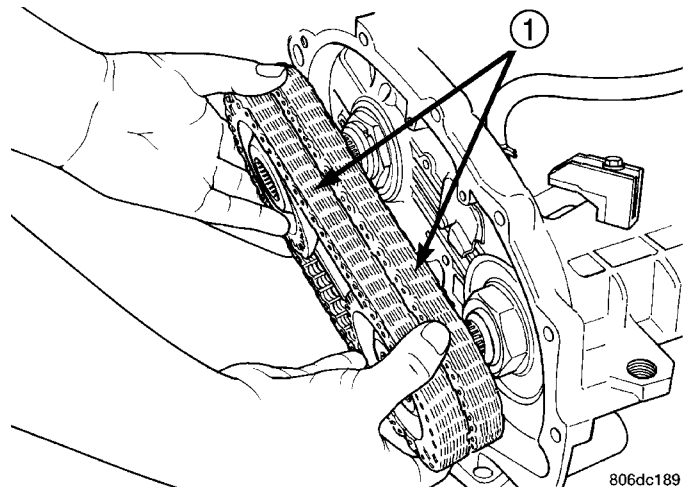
Remove Chain and Both Sprockets as an Assembly
